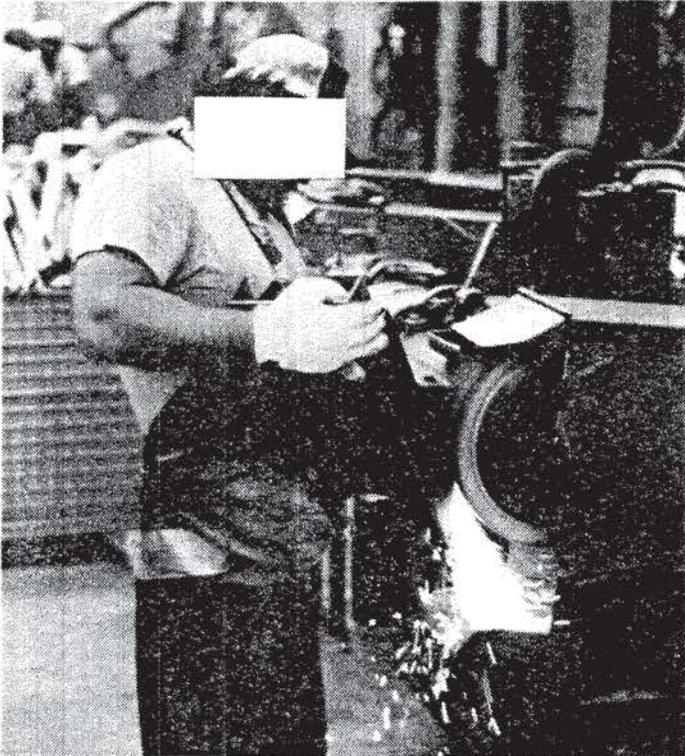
Grinding lift tube assembly, 25 lbs. Note body used to apply pressure on grinding wheel.
